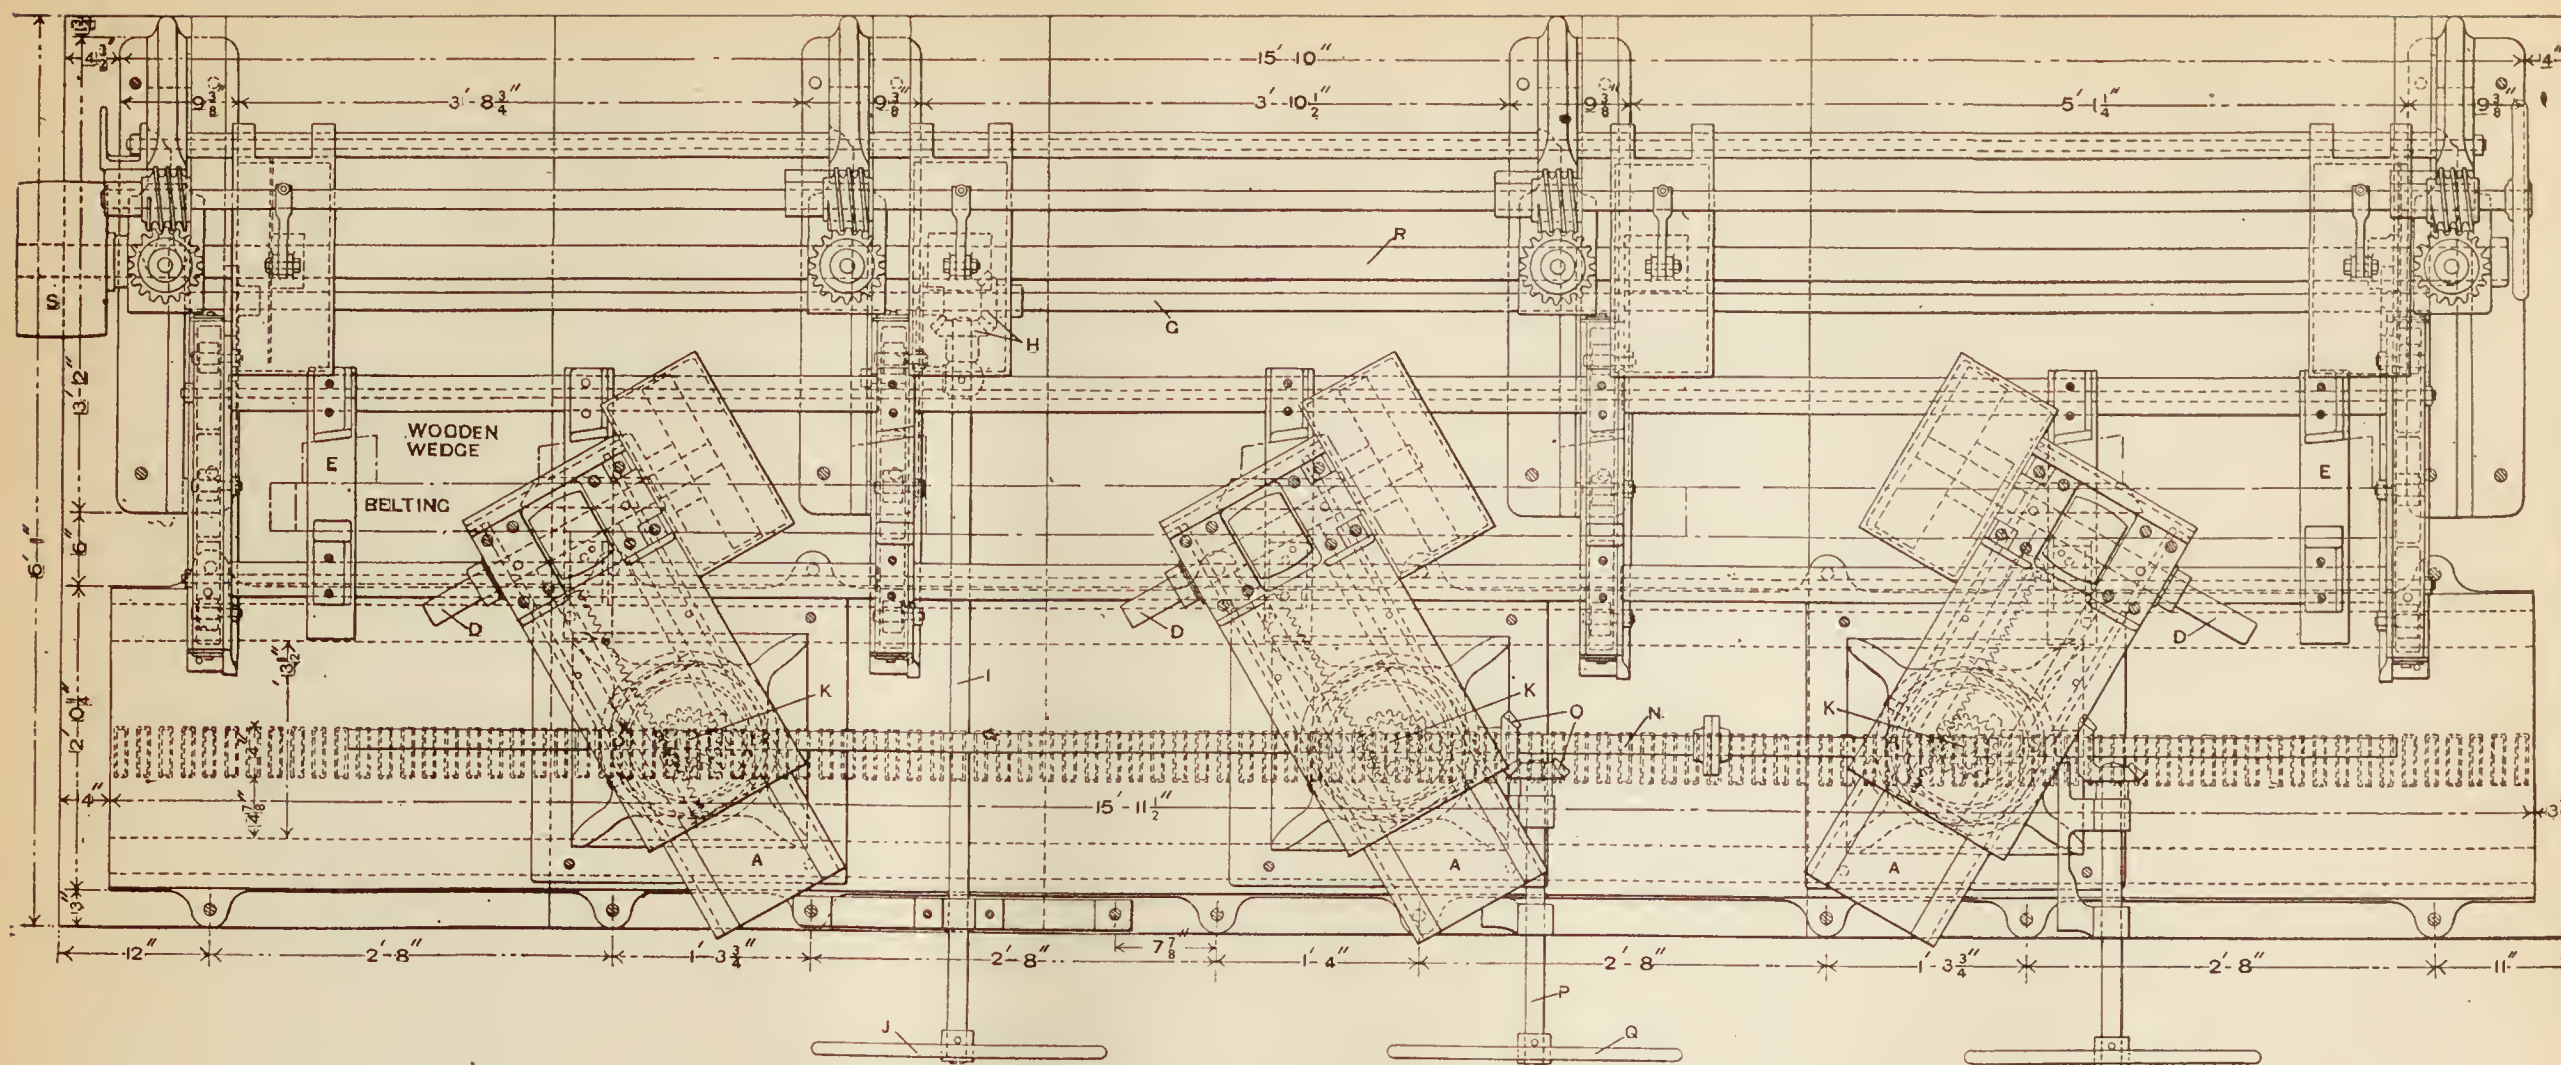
PLAN OF BELT-RAIL CHECKING MACHINE, GRAND TRUNK RAILWAY SHOPS.
